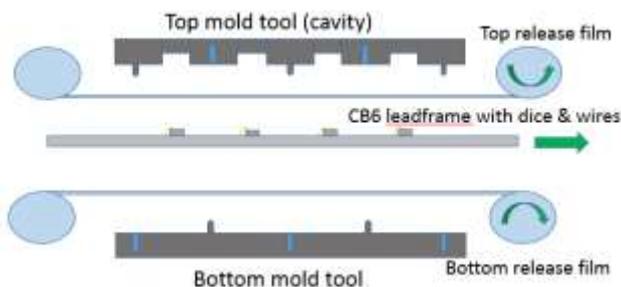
Reel-to-reel film-assisted transfer molding configuration
